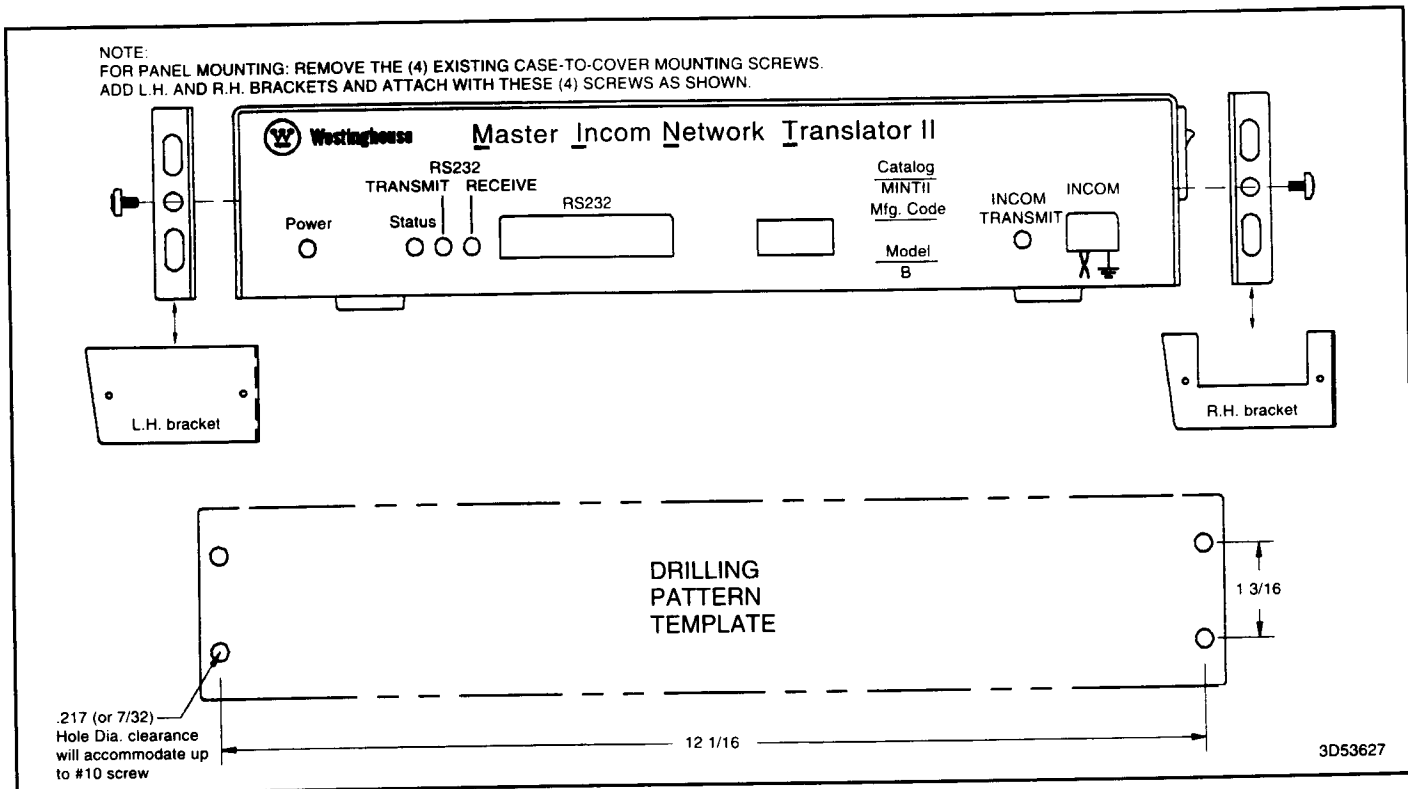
Panel Mounting for MINTII (Dimensions are in inches)
